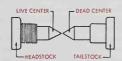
Checking alignment of lathe centers, looking from above,
